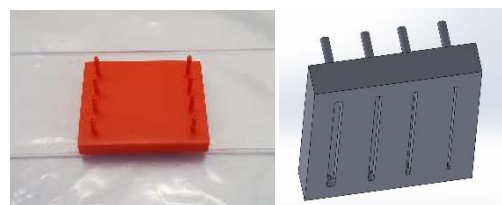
3D-printed fluidic system on glass substrate (left); CAD design of the 3D-printed part (right).
